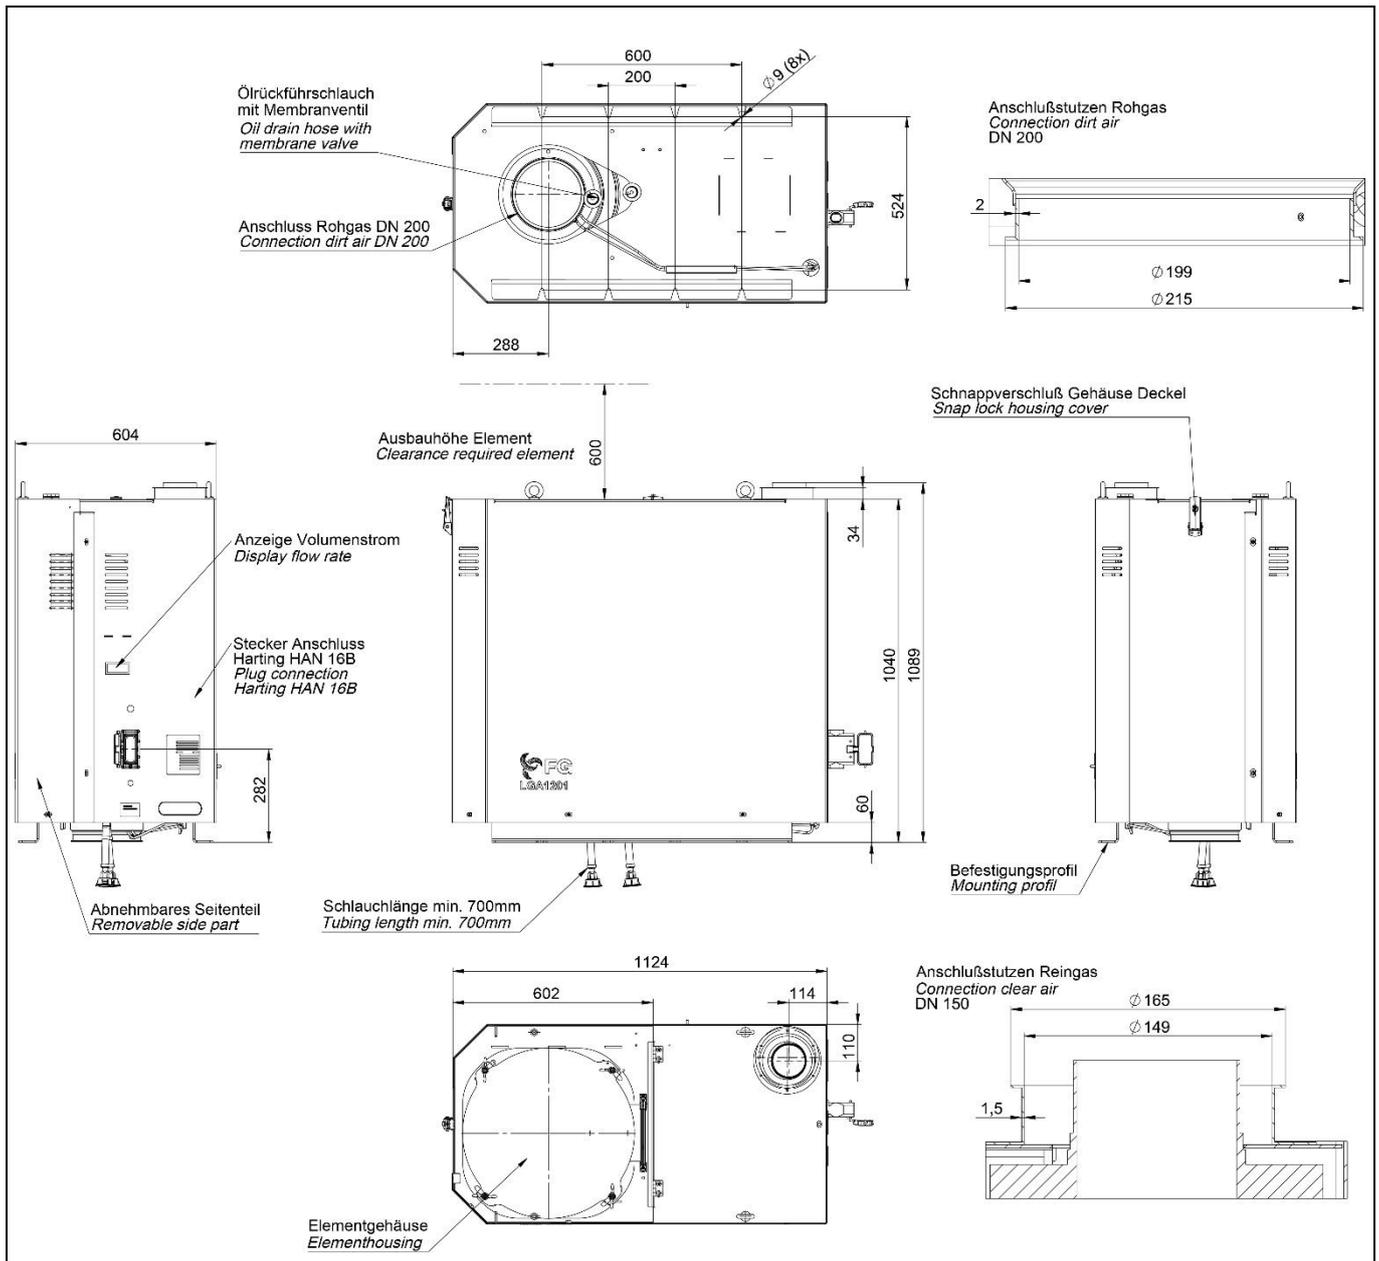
Dimension drawing of the LGA 1201 FU / FUW
